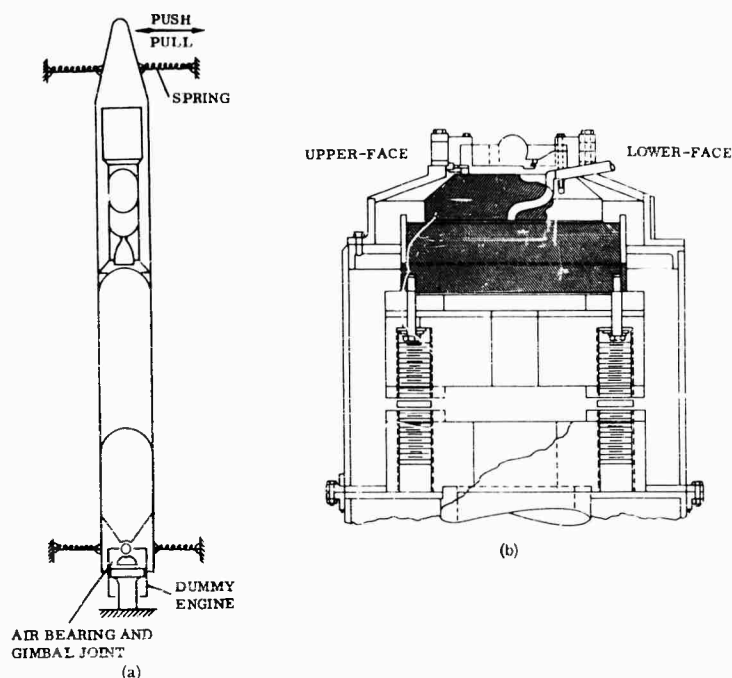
Test vehicle: (a) suspension system, and (b) cutaway view of air bearing
